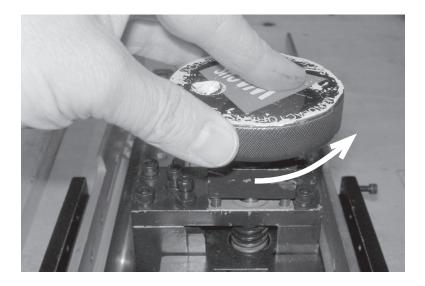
With the end block loose, turn the feed knob counter-clockwise to remove the feed screw.
